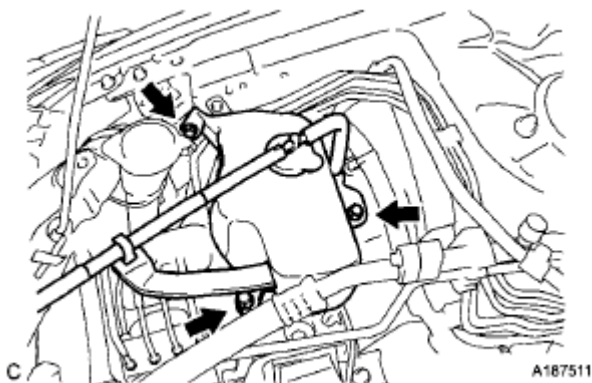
Locating Radiator Reserve Tank Assembly And Bolts
